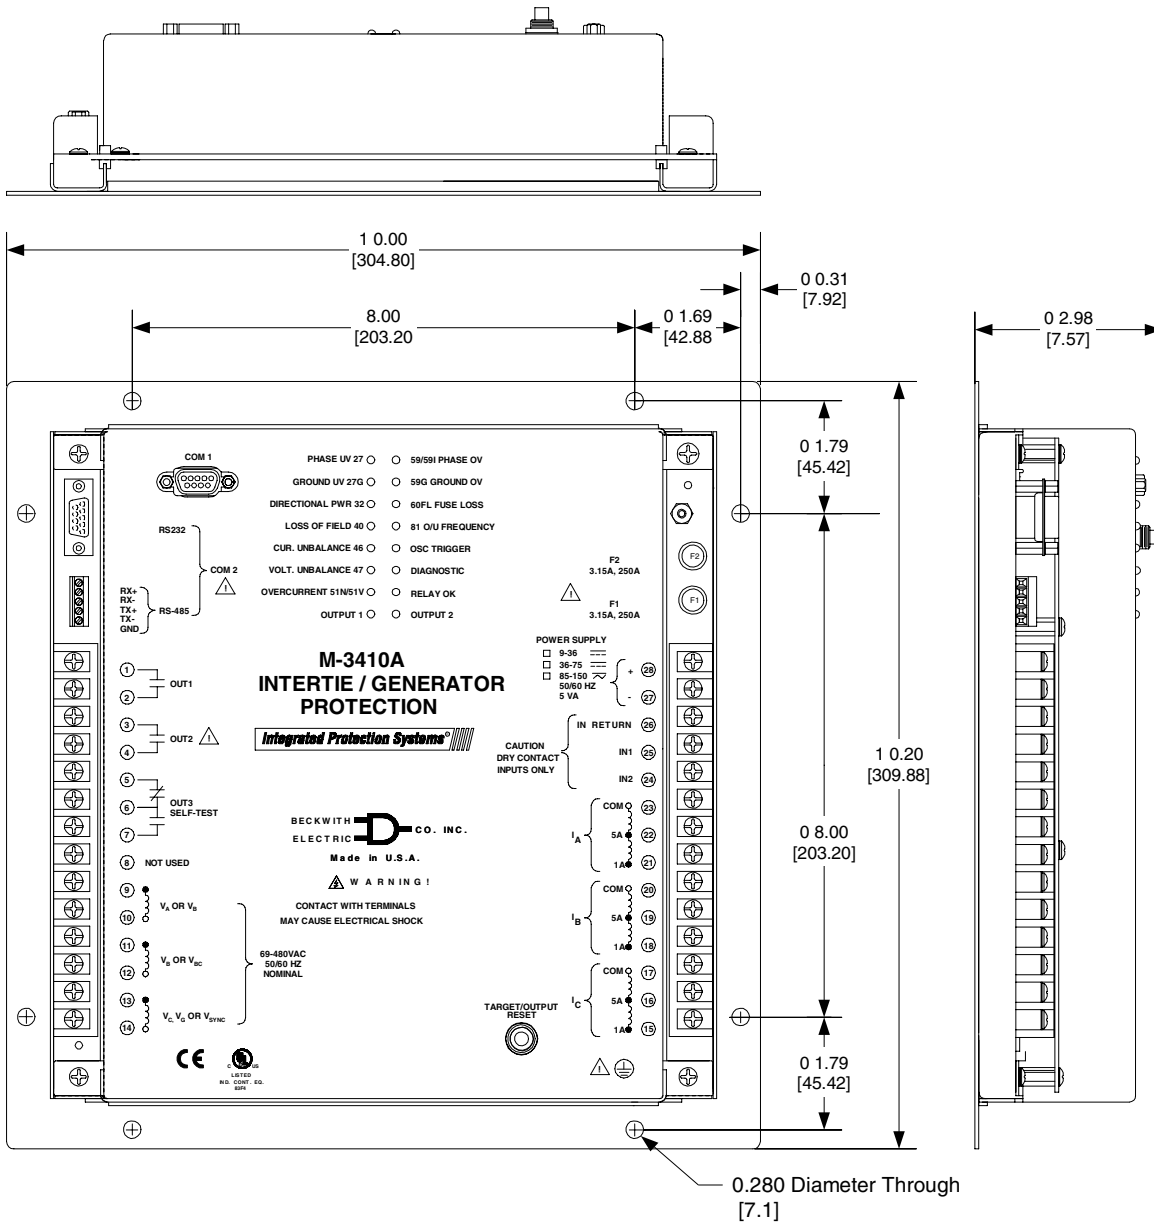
Surface Mount Version External Connections and Mounting Dimensions
